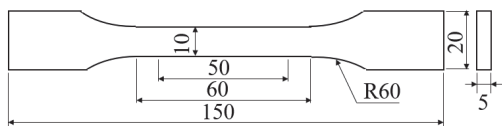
Dimension and shape of tensile specimen (Unit : mm)
